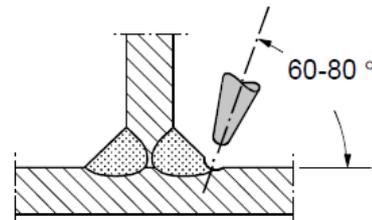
HFMI/PIT treatment angles at the weld toe of the fatigue specimens
